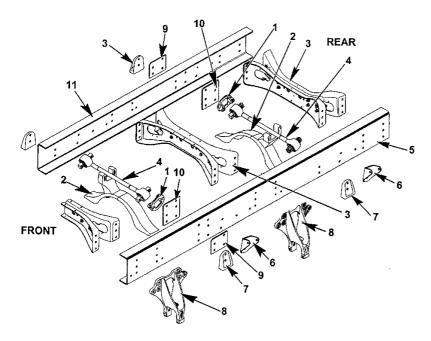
Forward Rear Springs, Torque Rod, Crossmembers And Mounting — 6x4
